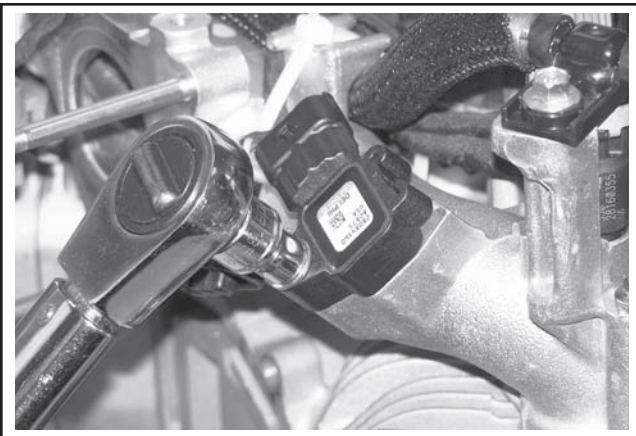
Torque Fuel Injector Cap Screw.
